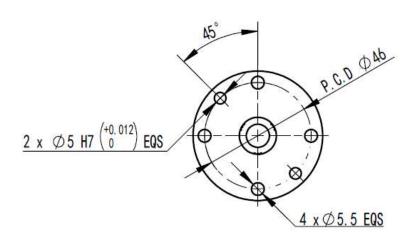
End Flange Interface Dimensions of GBT-S3A Robot
